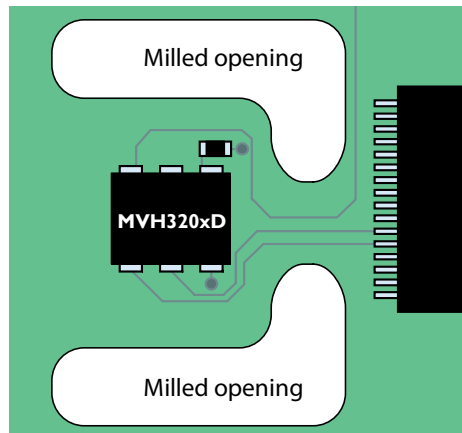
Thermal isolation of sensor using milled PCB openings.
